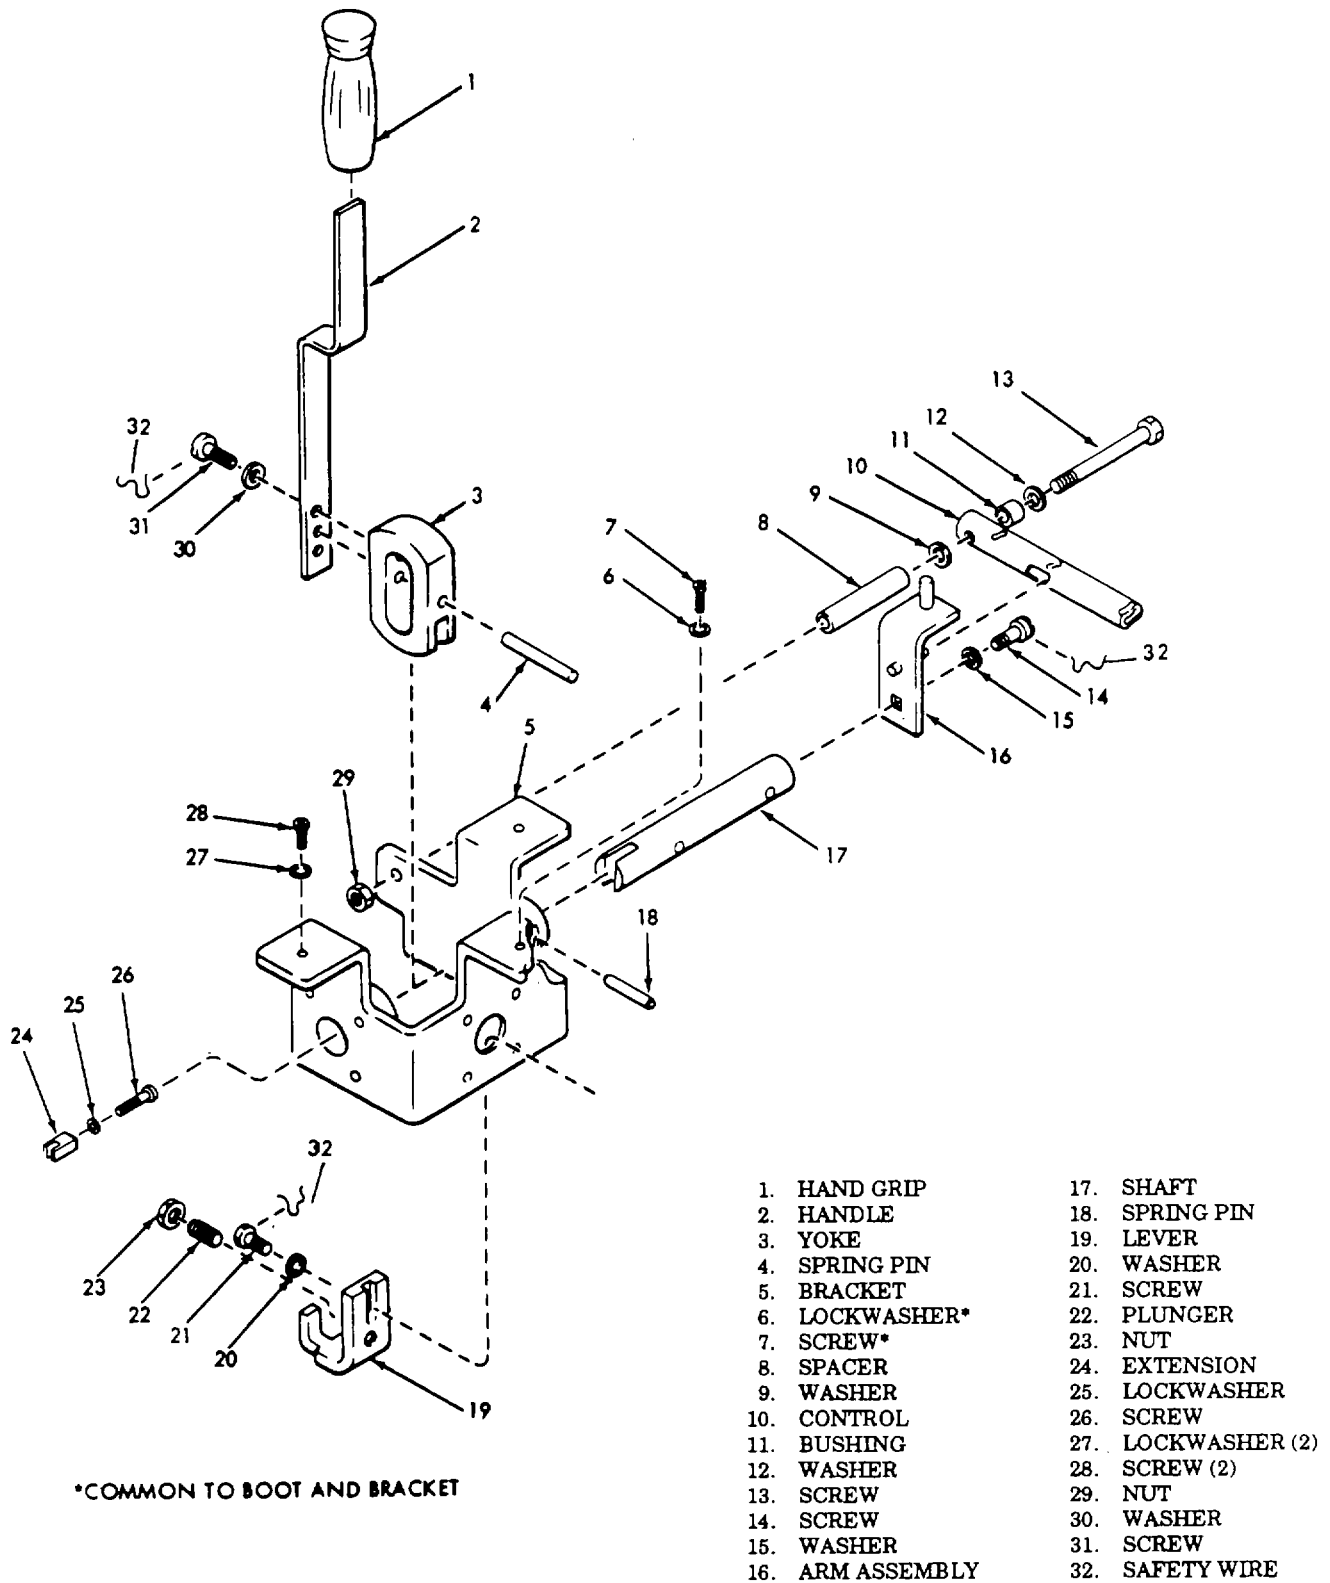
Hydraulic Control Console - Control Linkage Removal.
